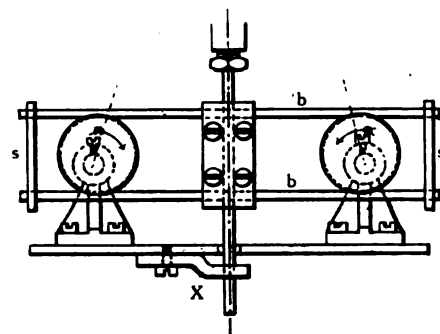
METHOD OF DRIVING VALVE GEAR.
